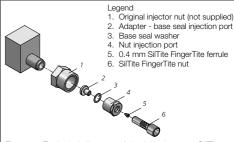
Exploded diagram of the injection port SilTite FingerTite assembly.
